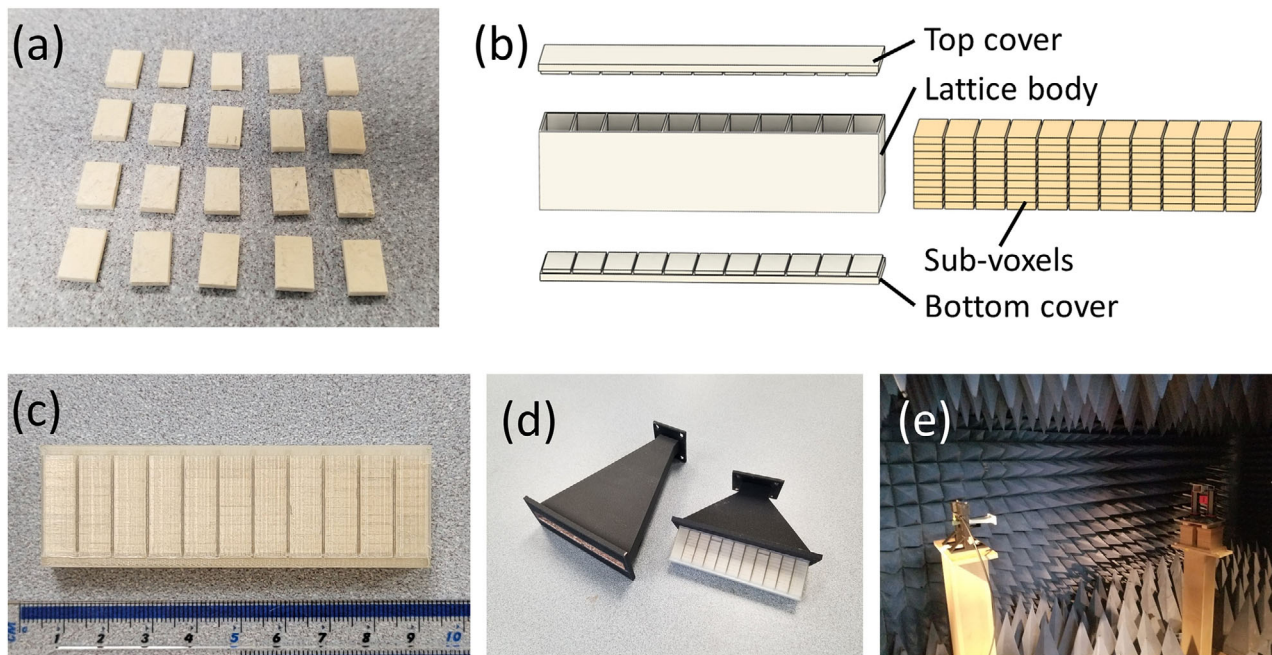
| Fabrication and measurement of the filled voxel GRIN lens: a) ABS/BaTiO₃ sub-voxel elements prepared by FAST; b) schematic illustration of the assembly showing the lattice body, top and bottom covers, and stacked sub-voxels; c) the assembled filled voxel GRIN lens; d) an AM H-plane horn antenna alongside the shortened horn coupled with the filled voxel GRIN lens; e) the arrangement for the experimental far-field measurement conducted within an anechoic chamber.
